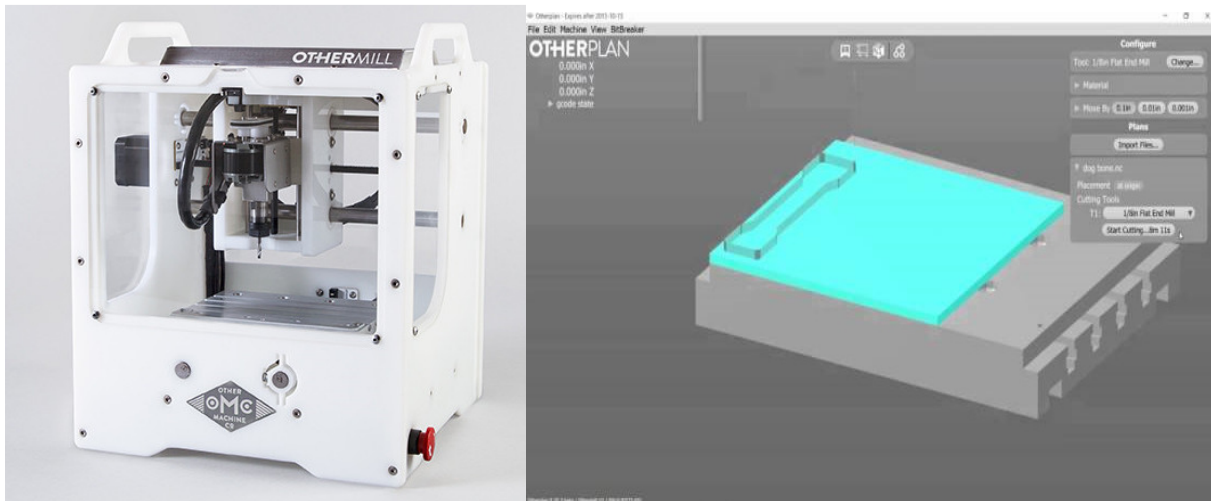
Othermill CNC milling machine (left) and the Otherplan software(right) used to control the milling flow and provide stock dimensions-ref. Othermill website
